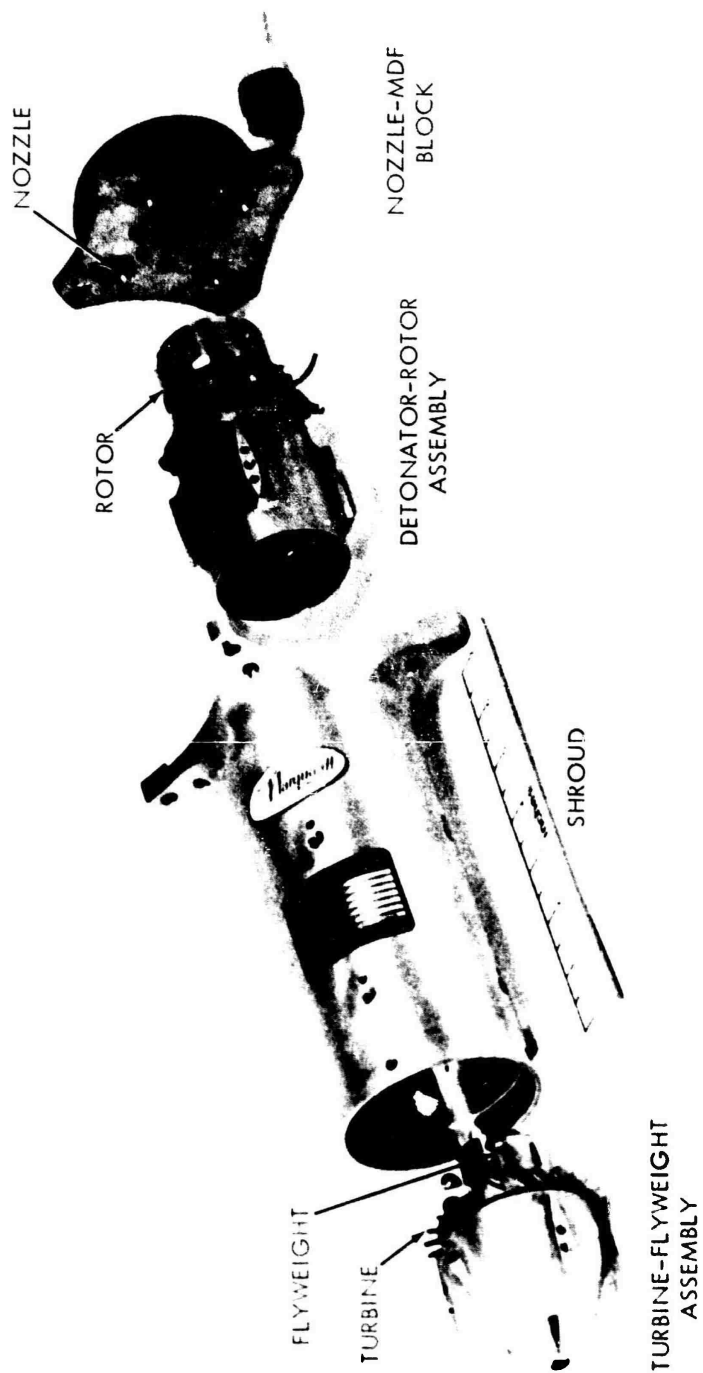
PHASE I SAFETY AND ARMING DEVICE EXPLODED VIEW
